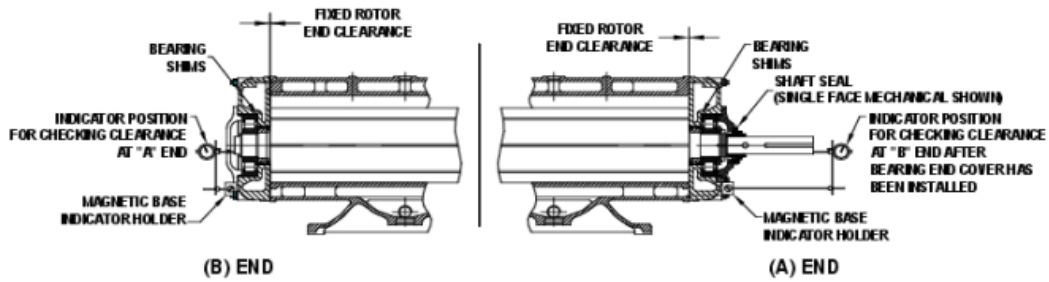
Rotor End Clearance - bearings positioned by shims.
